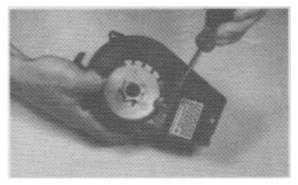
Adjust rope tension as indicated on decal located inside starter housing.
